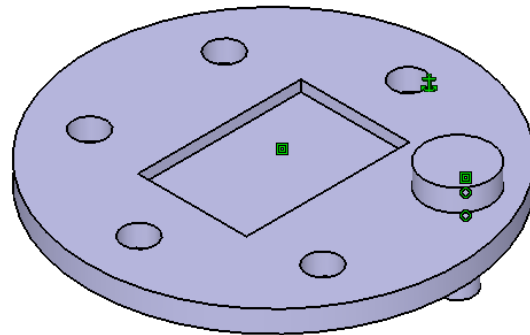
The Pin assembled to one of the instances of the patterned hole
